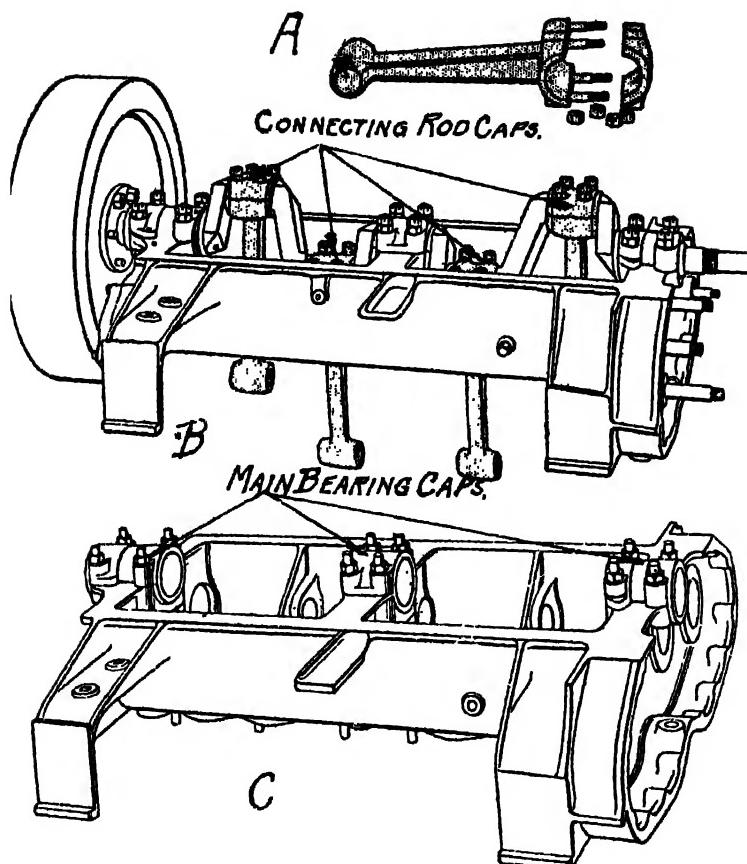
Showing Method of Supporting Crankcase to Provide Ready Access to Connecting Rods and Crankshaft Bearings.
